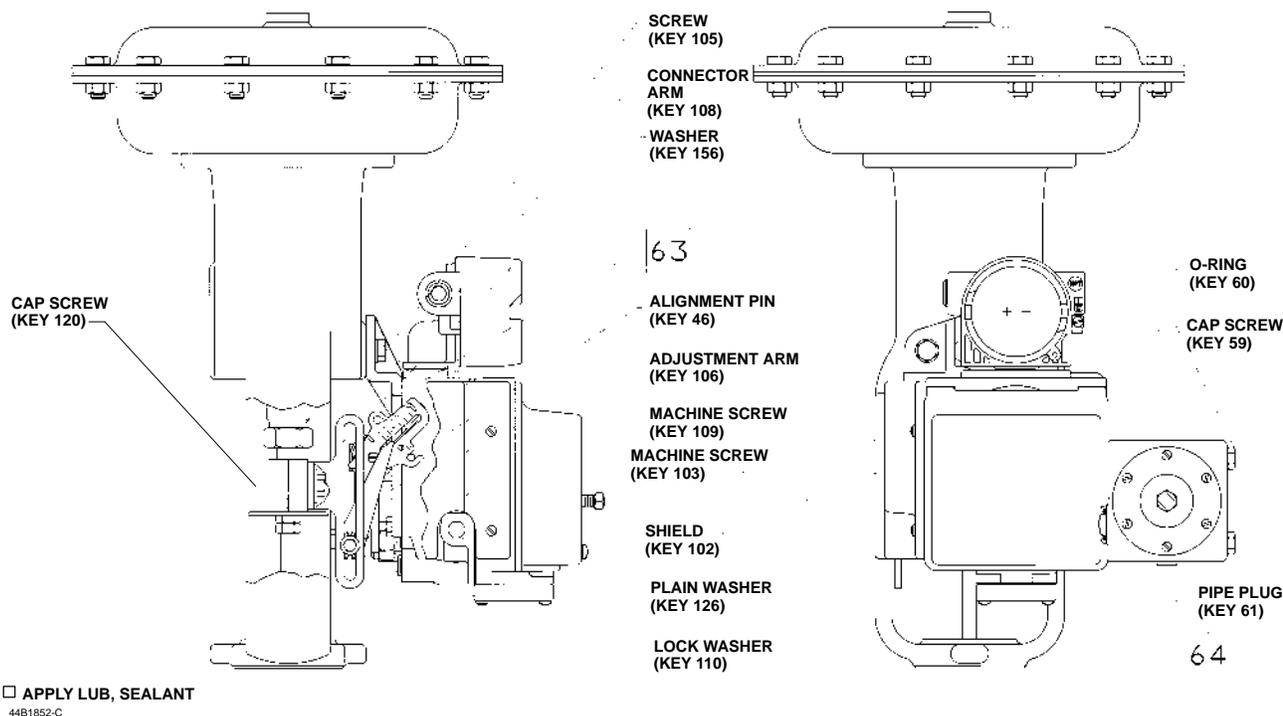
Type DVC5010 or DVC6010 Digital Valve Controller with Integrally Mounted Filter Regulator Yoke-Mounted on Type 657/667 Size 30-60 Actuator
